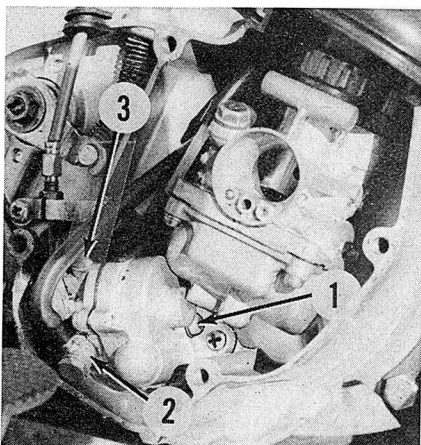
View of oil injection pump installed. Pump drive gears are lubricated by oil at screw (1). The oil inlet line runs from the tank to inlet union (2). Outlet union is shown at (3).
